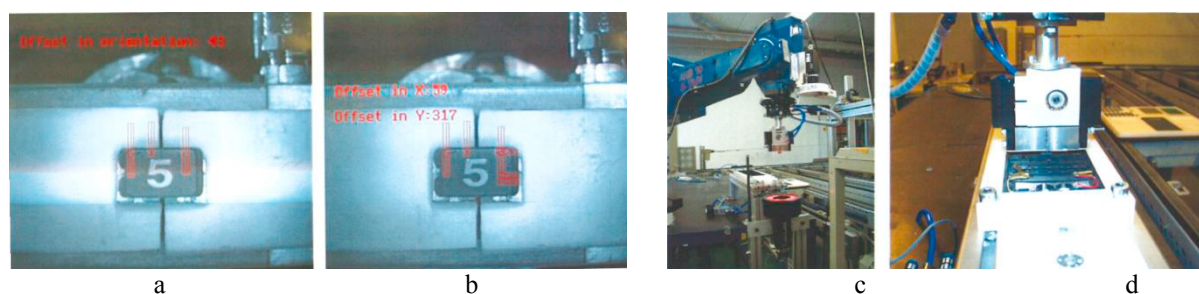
Assembly Process: (a) Offset in orientation, (b) Offset in position, (c) Inspection by PICTOR, (d) Peg-in-hole assembly.
